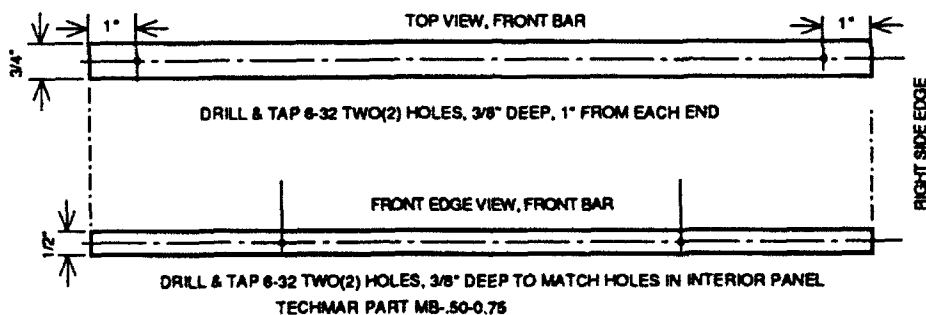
FRONT CROSS MOUNTING BAR DRILL GUIDE
